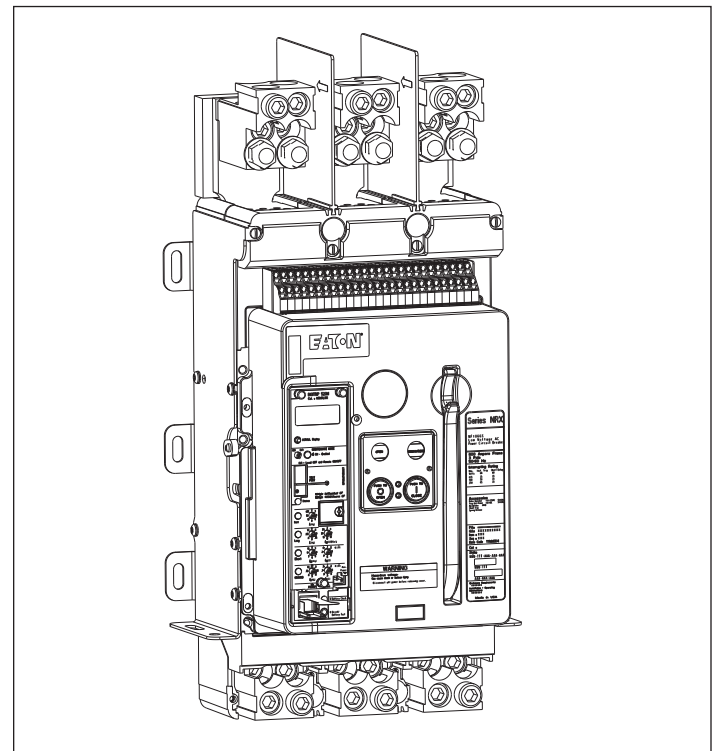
Step 7.1—Cable terminals connected directly to bus adapters on load side and supported bus extenders on line side
